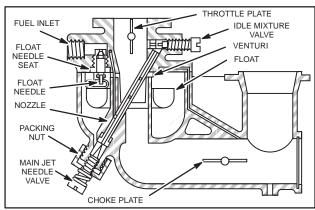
TYPICAL TWO PIECE FLO-JET CARBURETOR
